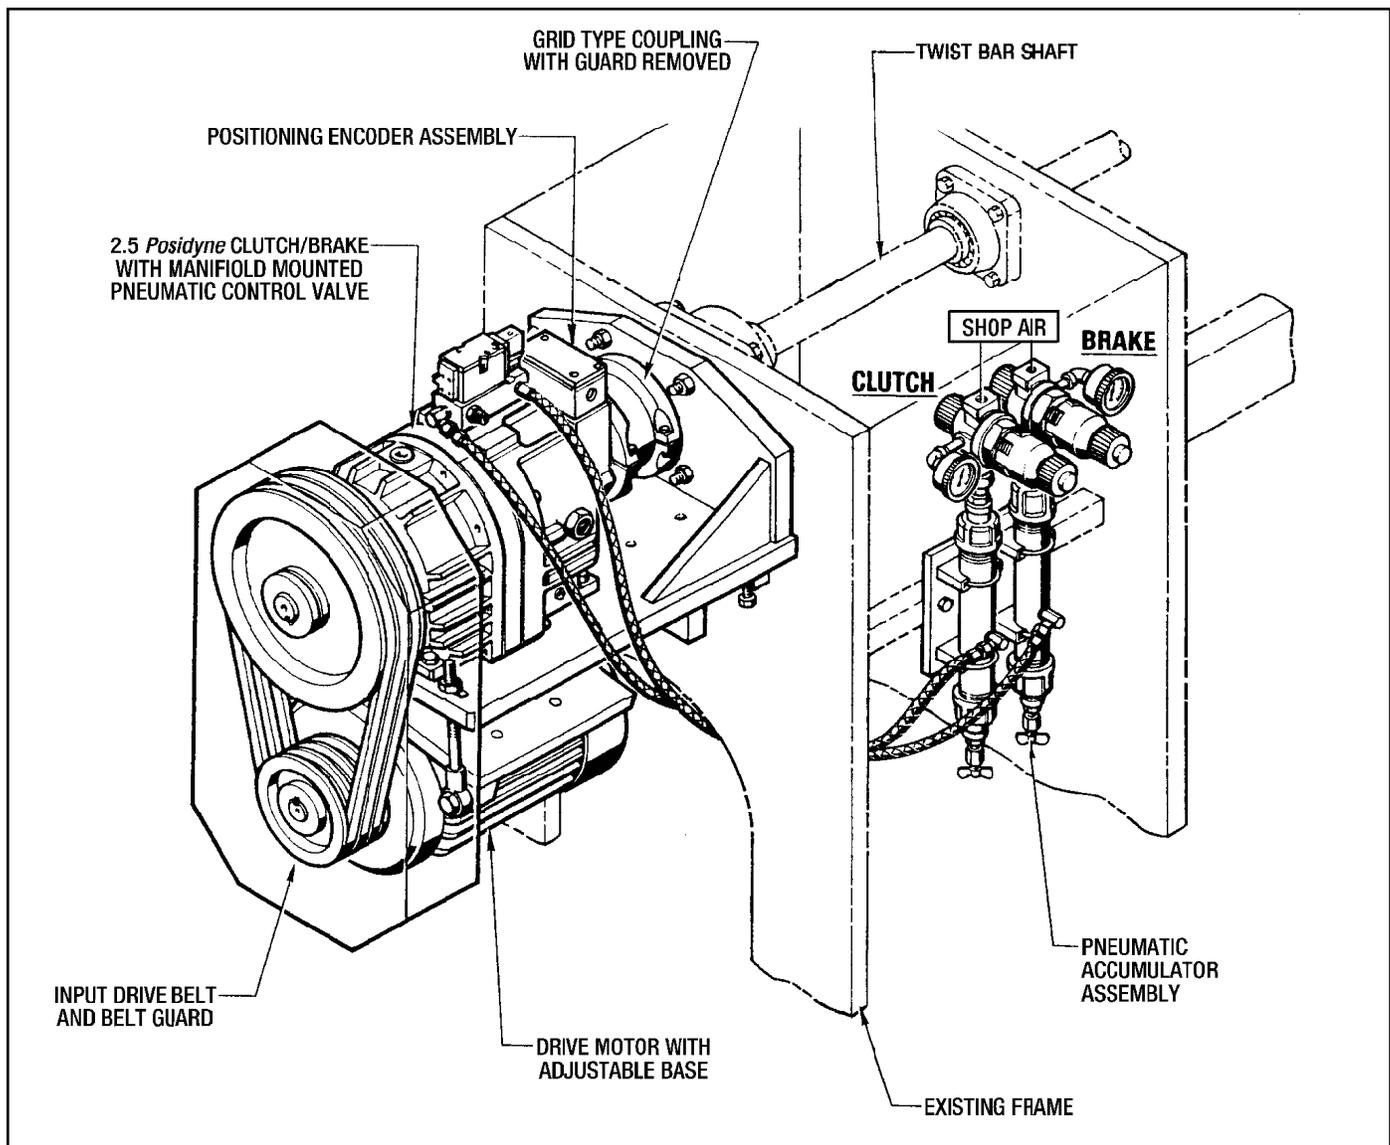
Air Actuated *PosiWeave* Drive Package
